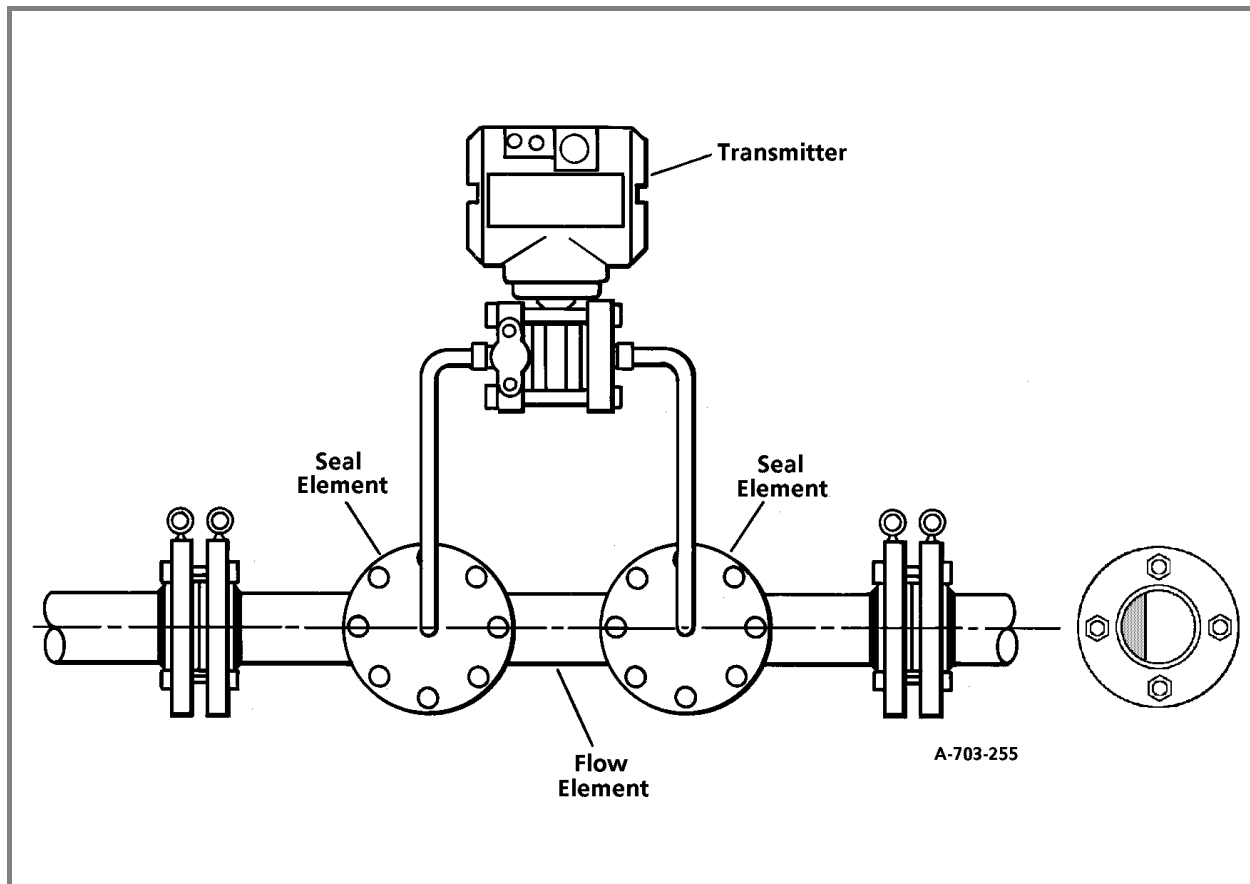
Typical WEDGEMETER Horizontal Installation
